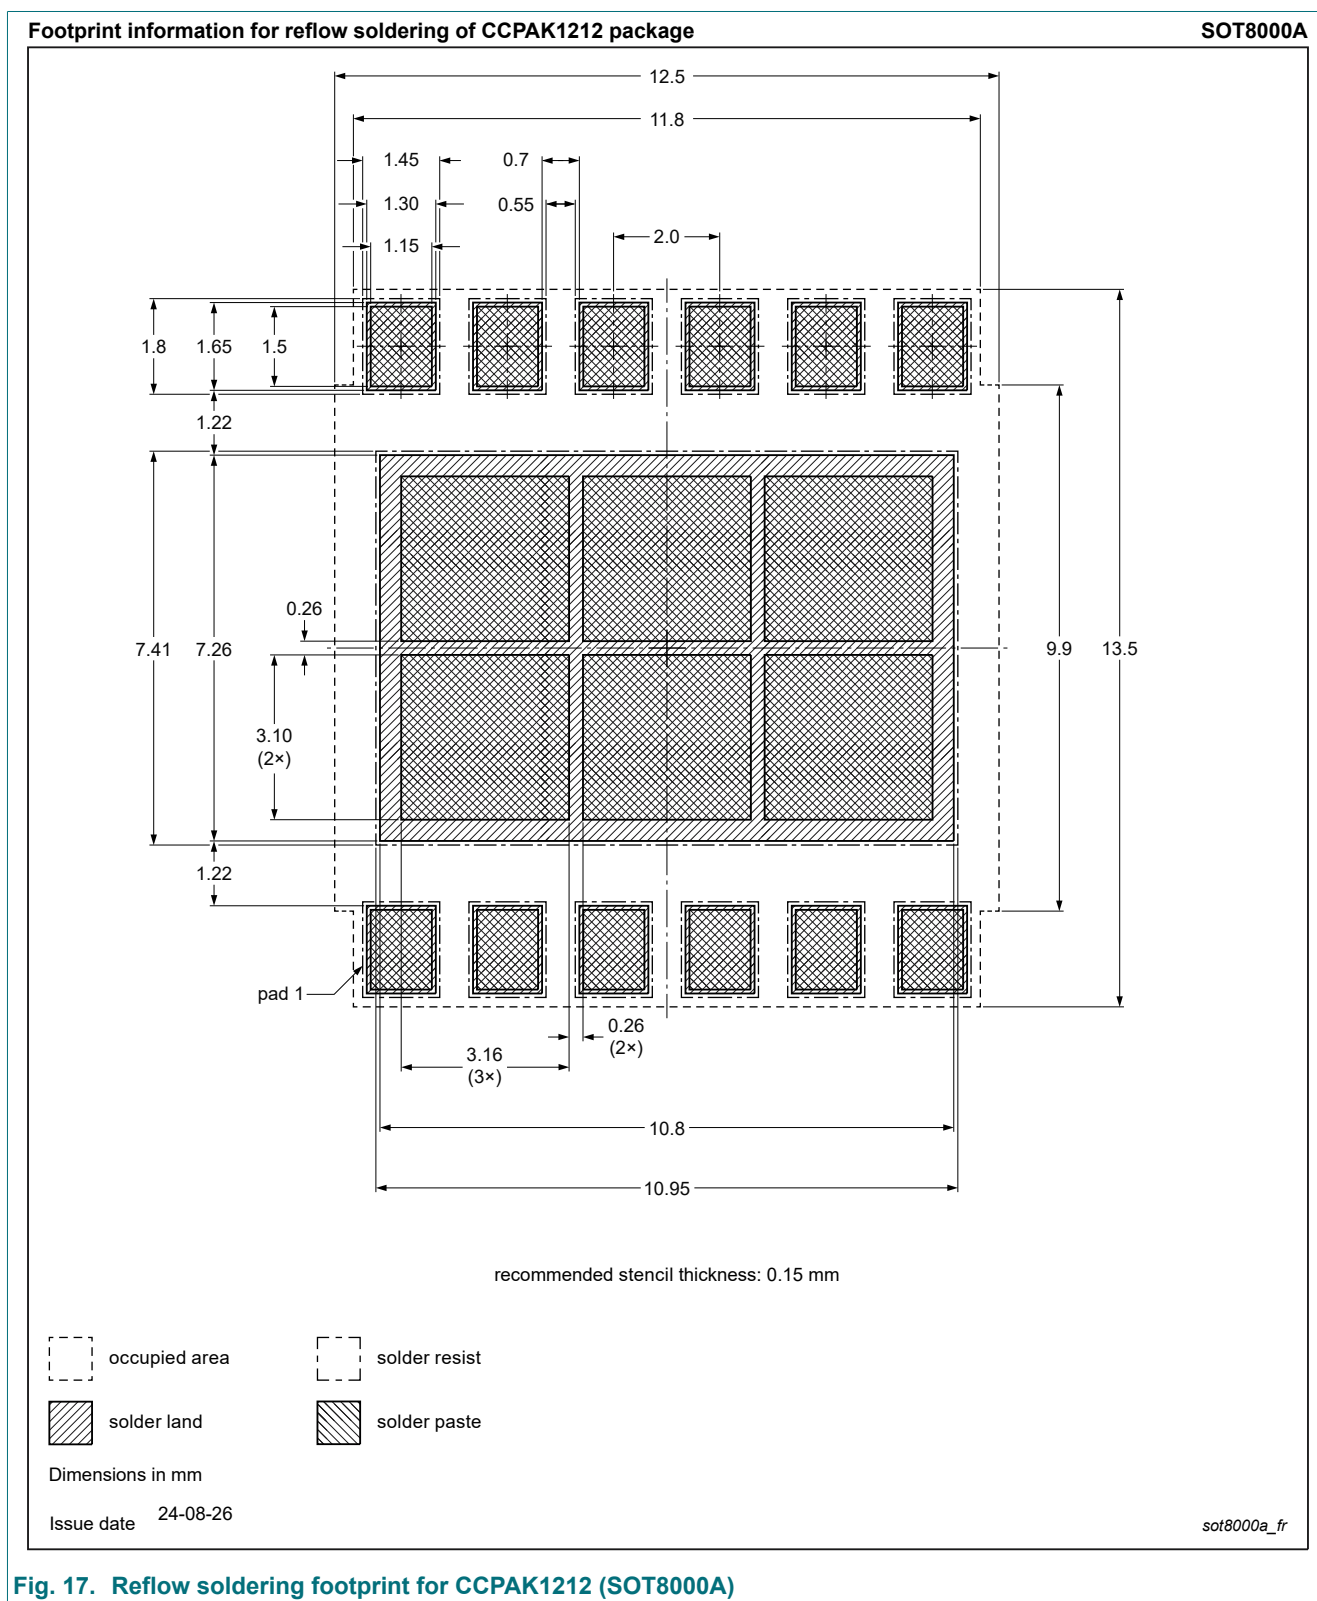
Reflow soldering footprint for CCPAK1212 (SOT8000A)
